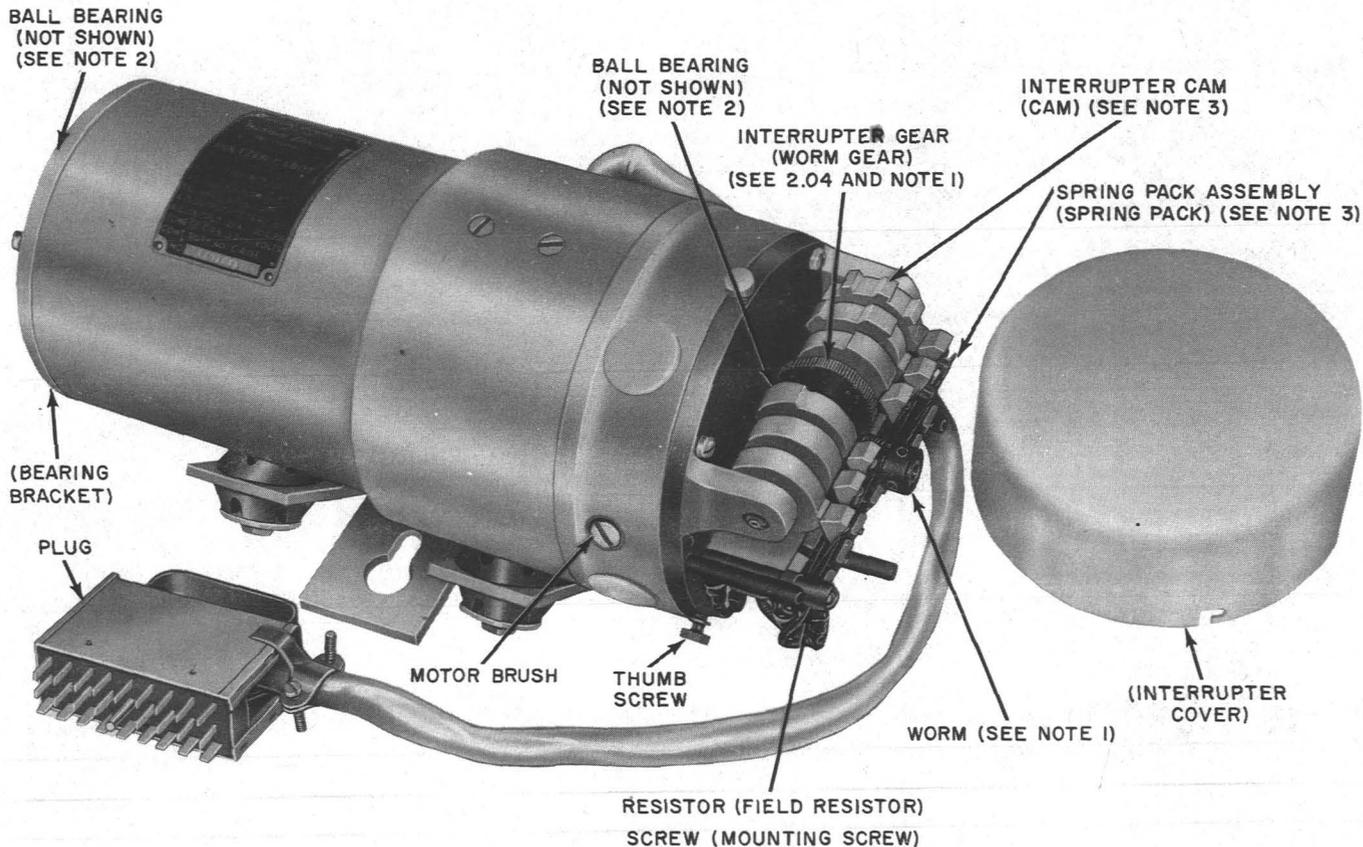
KS-15804 Type Ringing Machine—Electric Specialty Co.—Interrupter Shaft Assembly With Individually Mounted Parts (KS-15804 LI DC Machine Shown)
